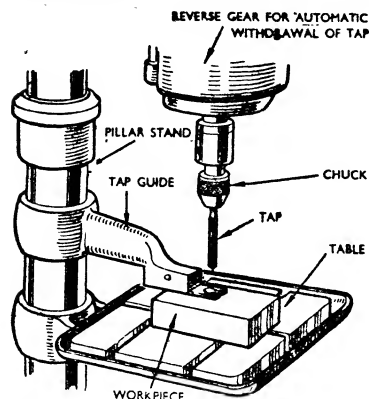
Tapping machine for producing internal screw threads in large numbers. Tap is withdrawn automatically.
